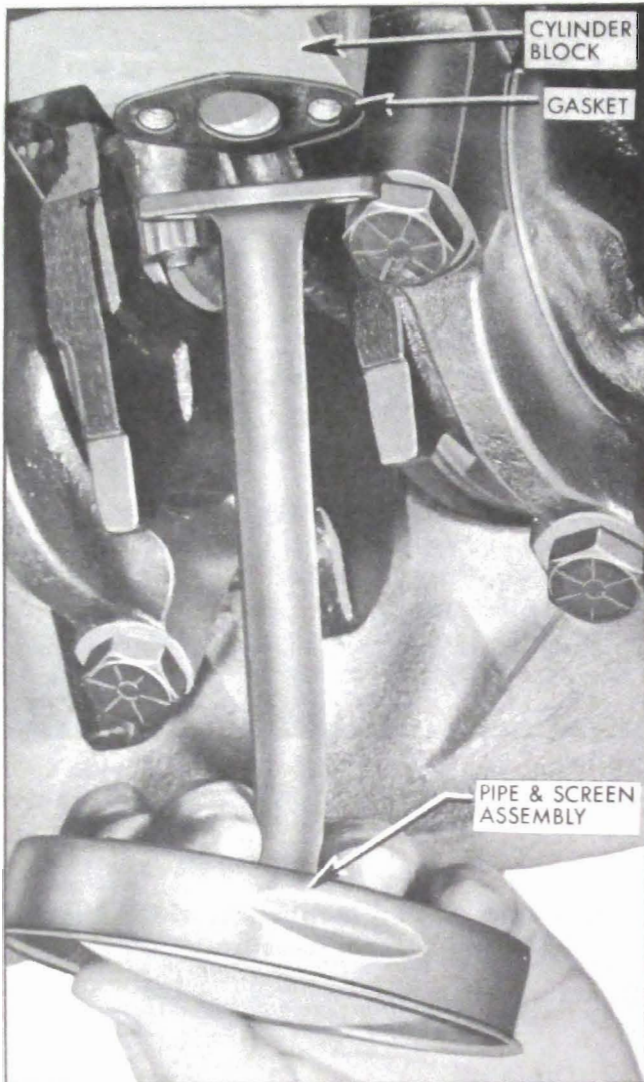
Installation of Oil Pump Pipe and Screen Assembly
